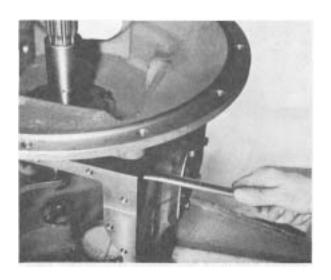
Install clutch housing and tighten stud nuts 60 to 80 ft. lbs. torque. Remove drive gear bearing cap and main drive gear.
